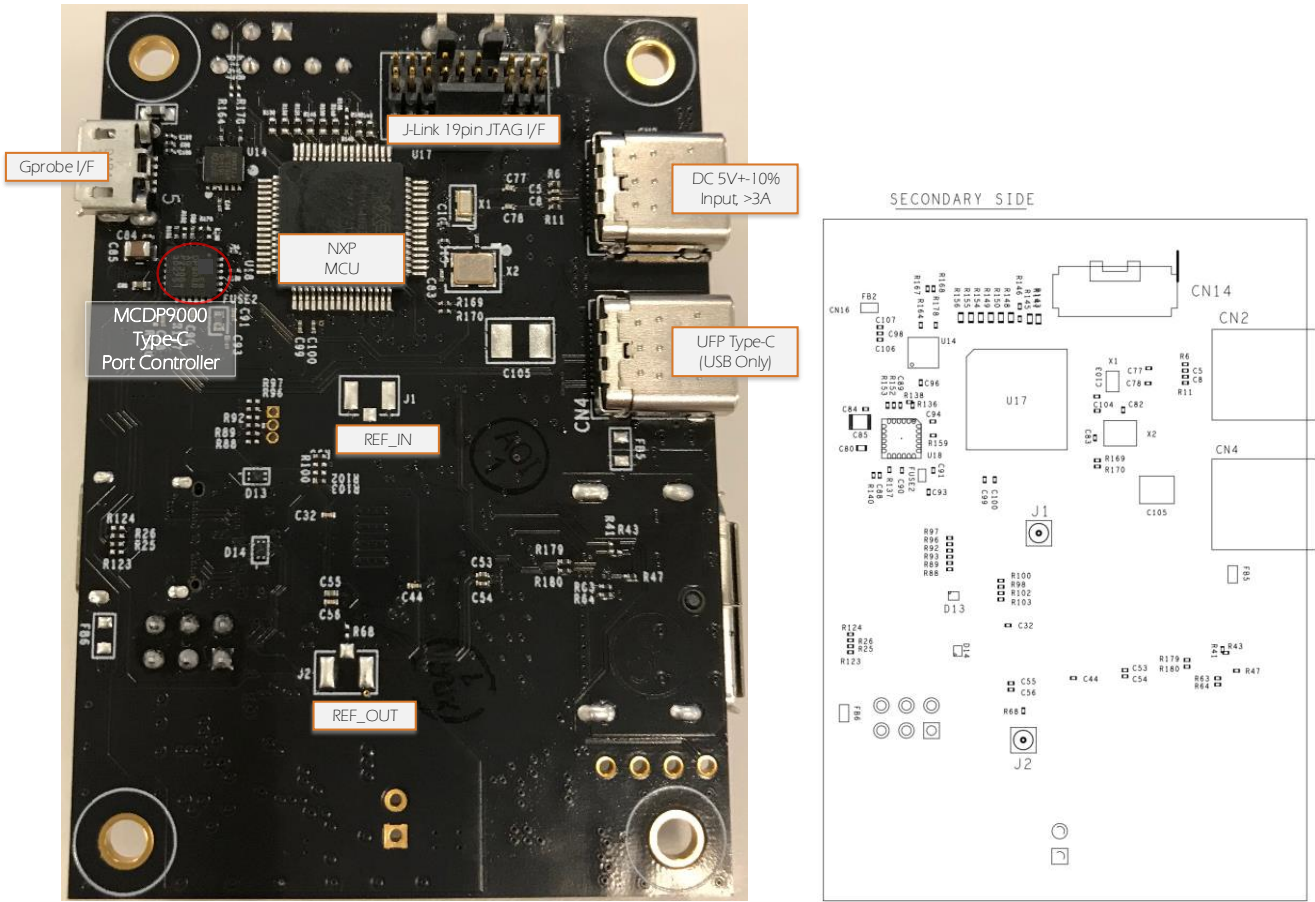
RD4-6000 Board Picture (Bottom Side)
